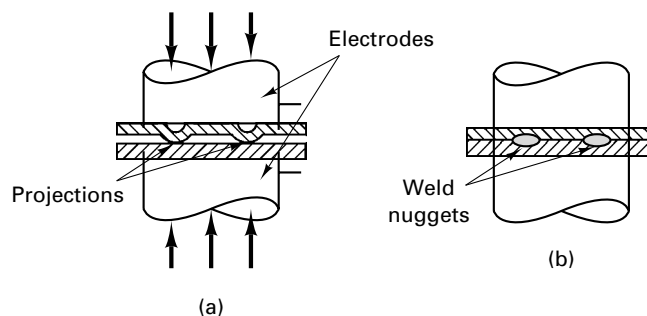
illustrates the principle of projection welding. A dimple is *embossed* into one of the workpieces at the location where a weld is desired. The two workpieces are then placed between large-area electrodes in a press machine, and pressure and current are applied as in spot welding. Since the current must flow through the points of contact (i.e., the dimples), the heating is concentrated where the weld is desired. As the metal heats and becomes plastic, the pressure causes the dimple to flatten and form a weld.
